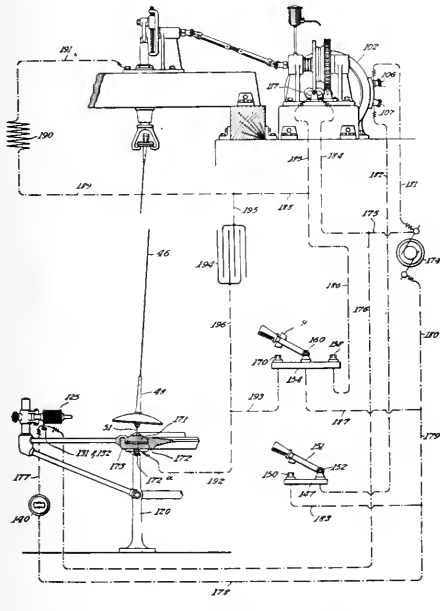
MODIFIED CONTACT AND WIRING FOR ELECTRICAL TYPE.
